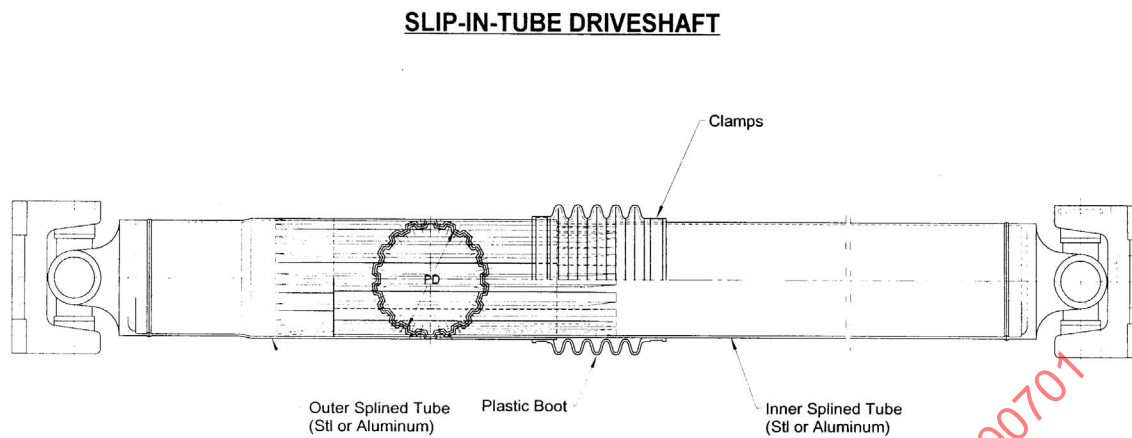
BASIC DRIVESHAFT CONSTRUCTIONS
